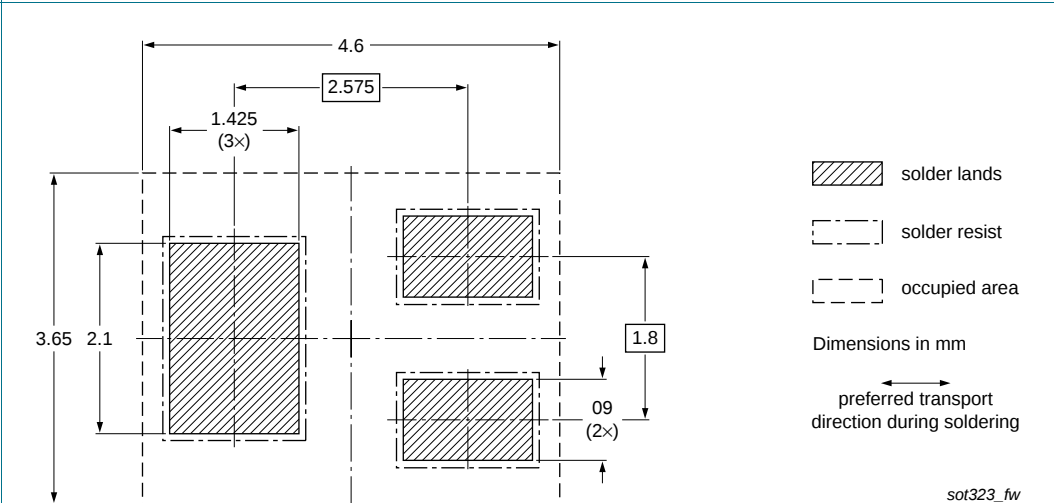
Wave soldering footprint PDTC143XU (SOT323/SC-70)
